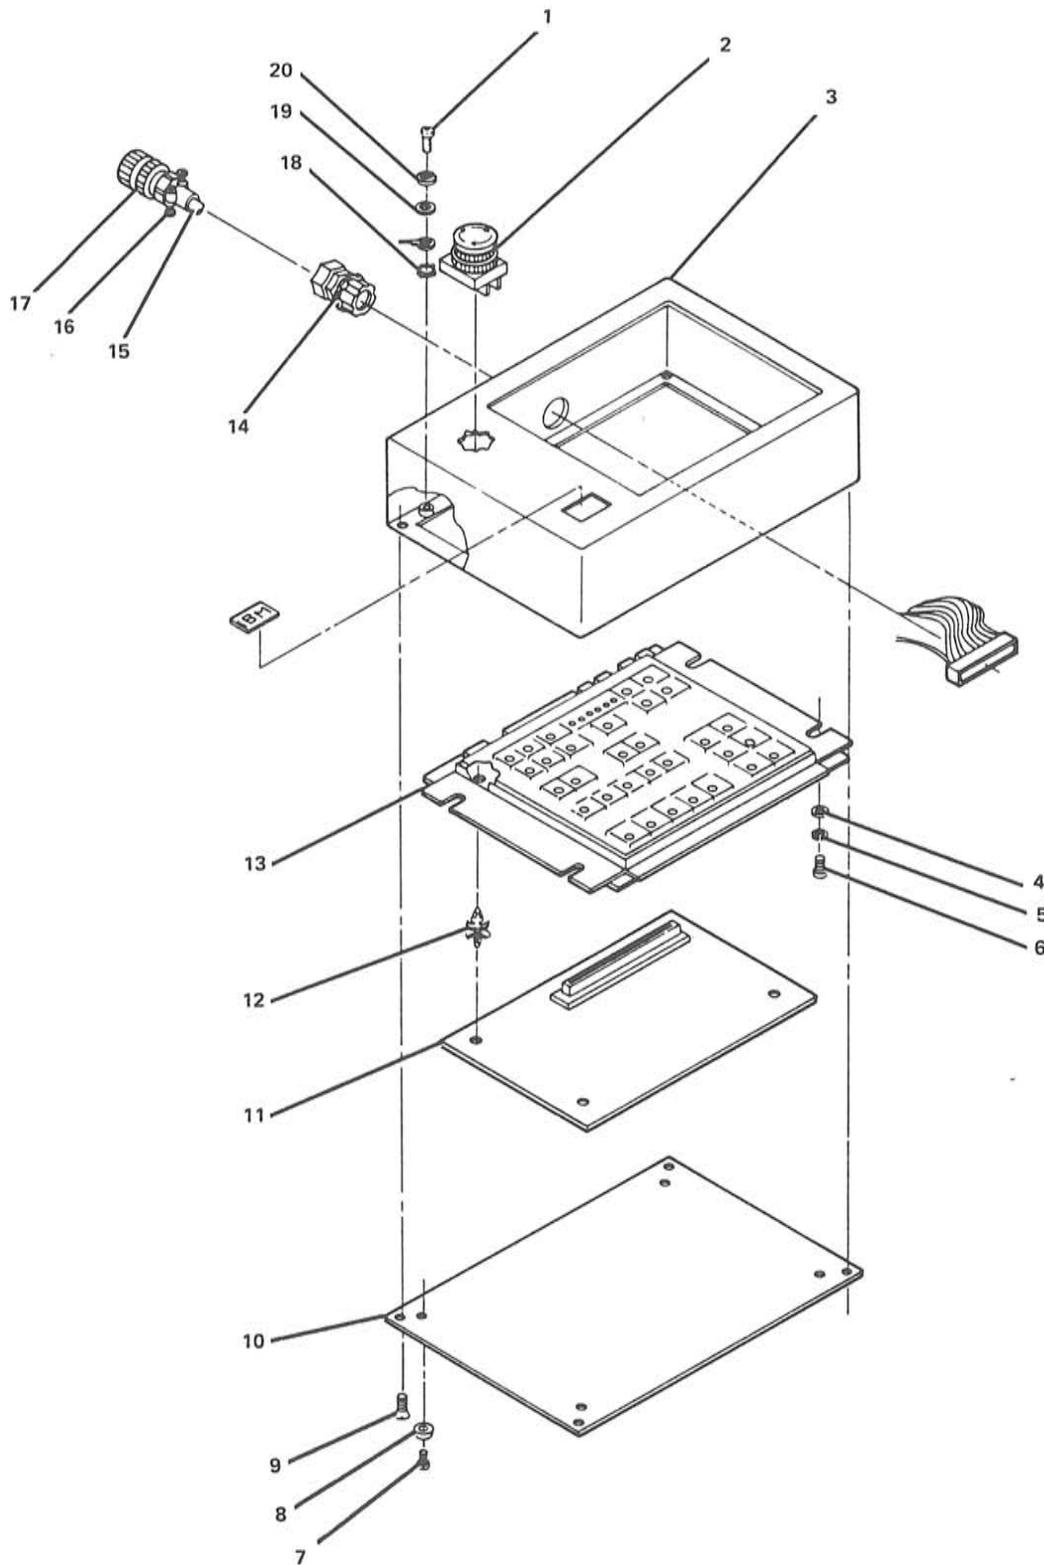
CONTROL PANEL ASSEMBLY. SEE LIST 8.
